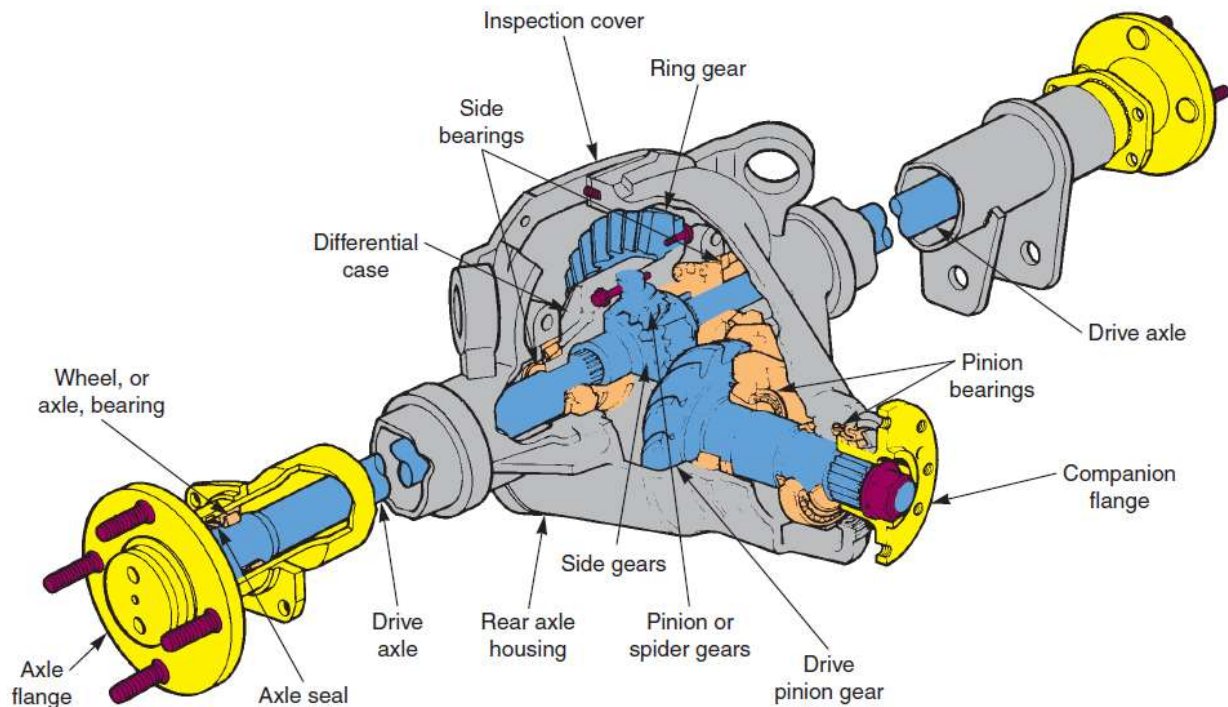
Cut section view of rear axle (Duffy, 2000)
